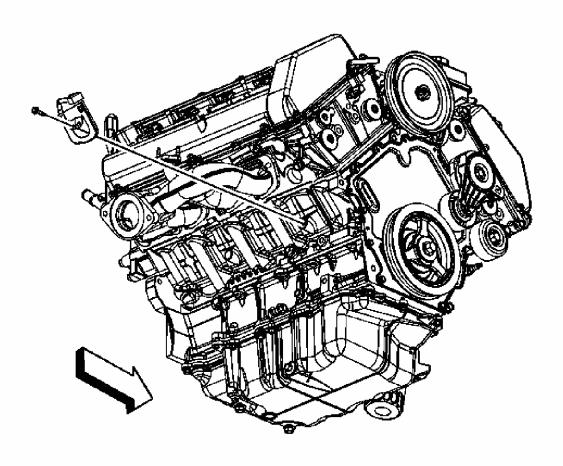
Identifying Coolant Heater & Bolt Courtesy of GENERAL MOTORS CORP.
